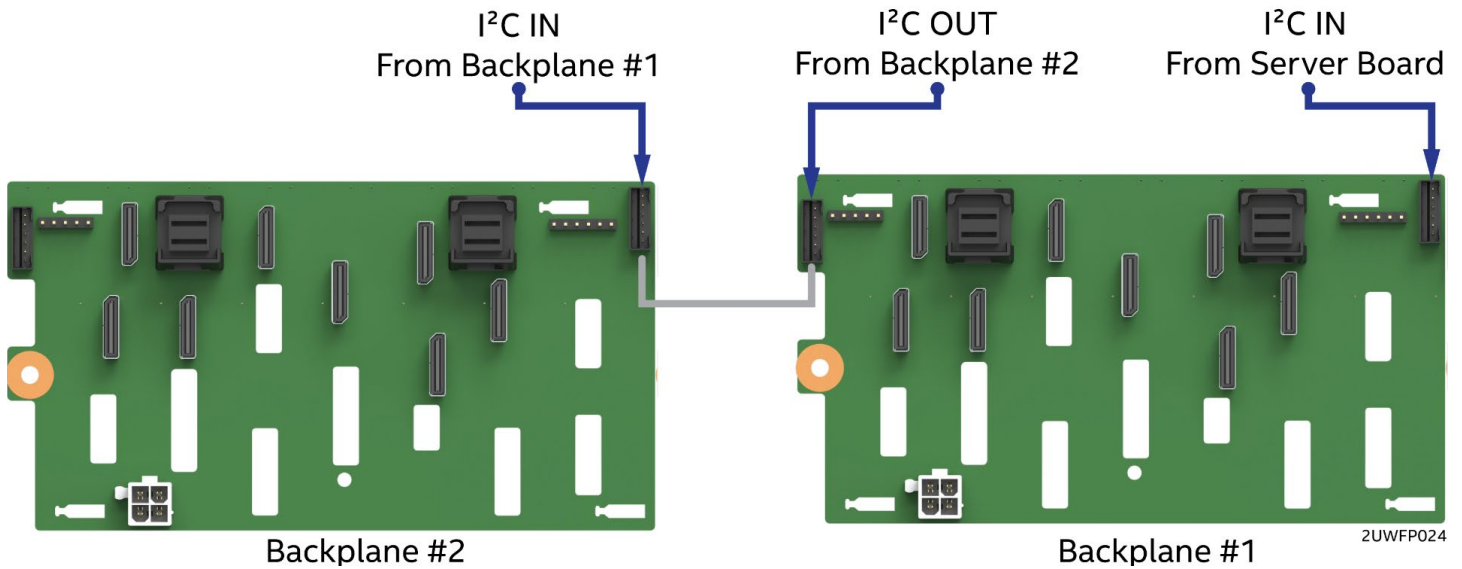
Dual 8x2.5" Hot Swap Backplane I²C Jumper Cable Installation
